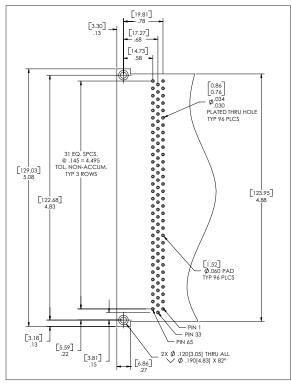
Figure A. Part # 510 108 125 Recommended Board Layout. Solder Side Shown.
